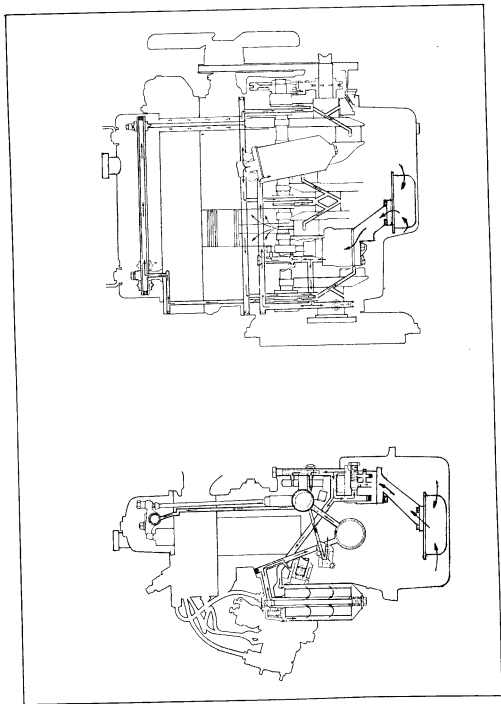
1.5 LITRE DIESEL ENGINE LUBRICATING SYSTEM
